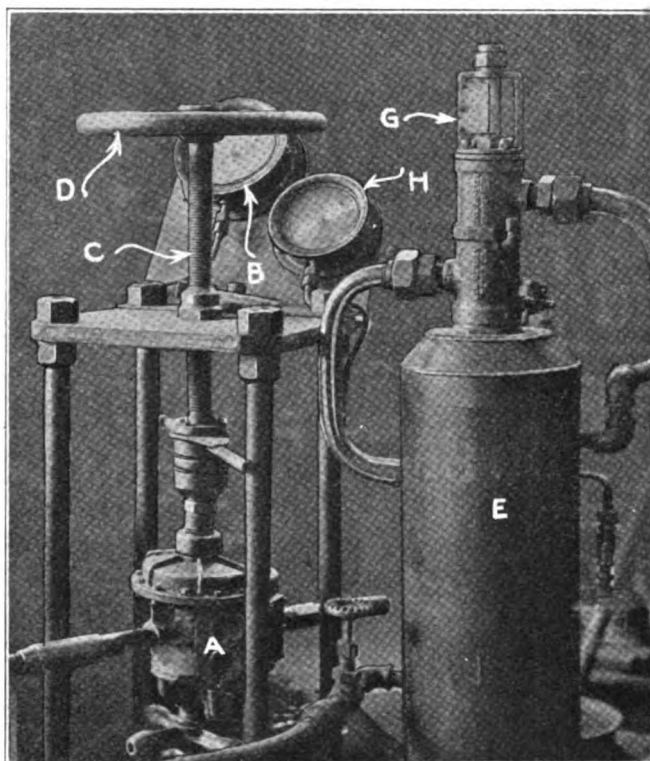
DEVICE FOR TESTING AIR DRILLS
